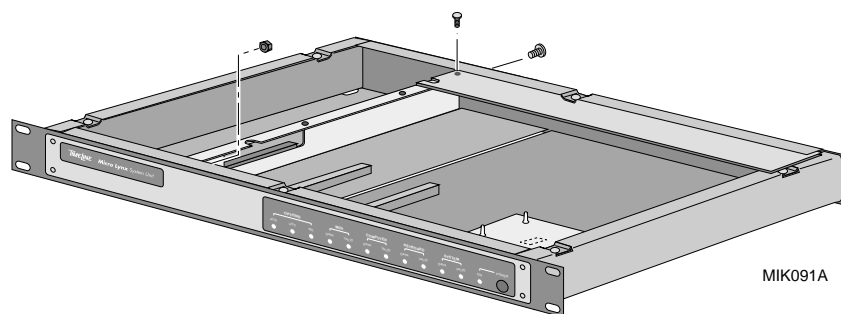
13. Install the ACG Option Card Bracket
